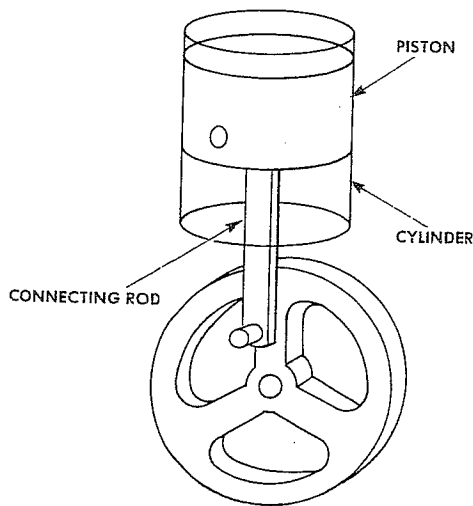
A connecting rod connects the piston to a spoke on a wheel.
